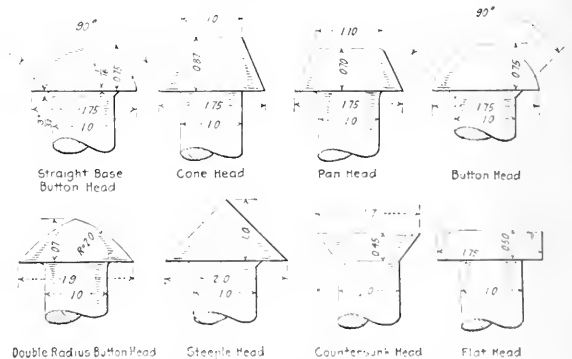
ACCEPTABLE FORMS OF RIVET HEADS
